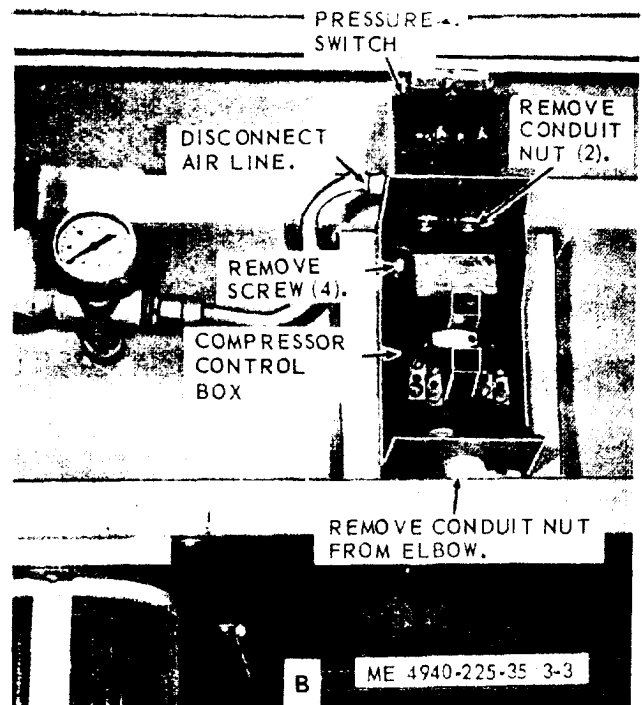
Air compressor pressure and starter control box, removal and installation.
